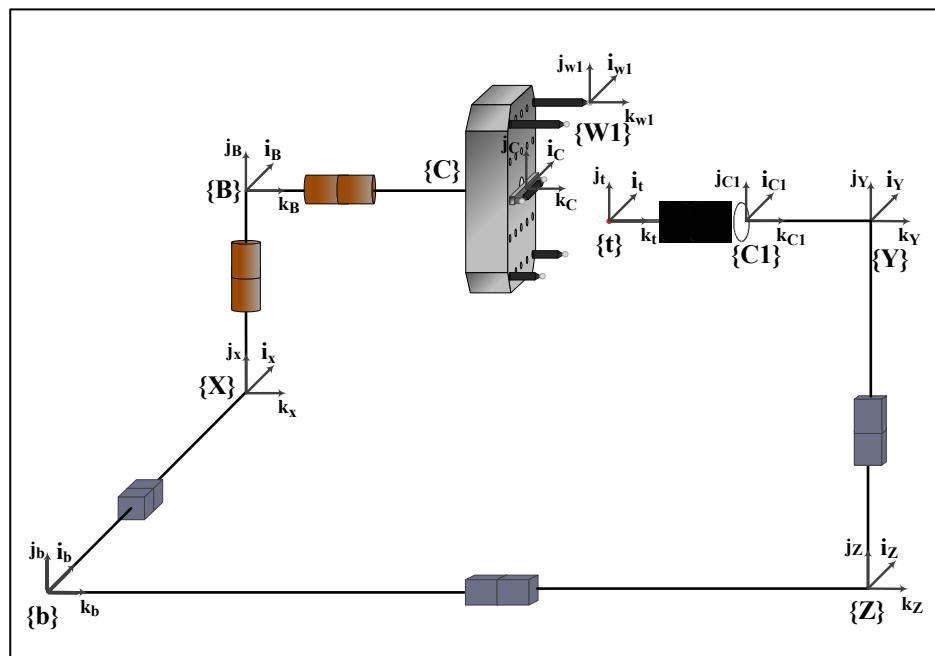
The nominal kinematic model of the tested wCBXbZY(C1)t five-axis machine tool
